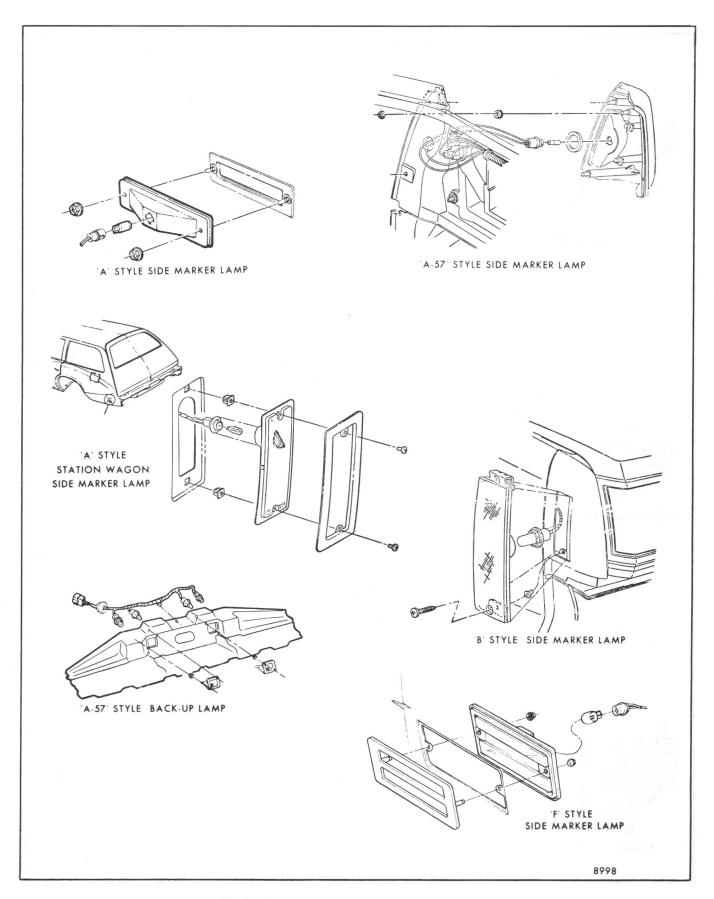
Exterior Lamp Installation - Pontiac Styles
